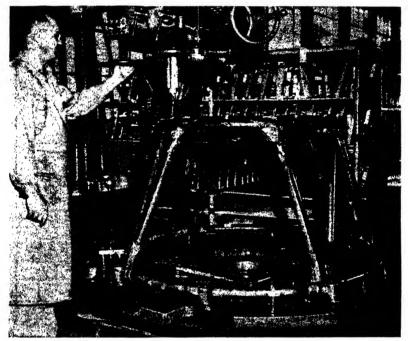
Turntable fixture for drilling airplane-engine mounts.
